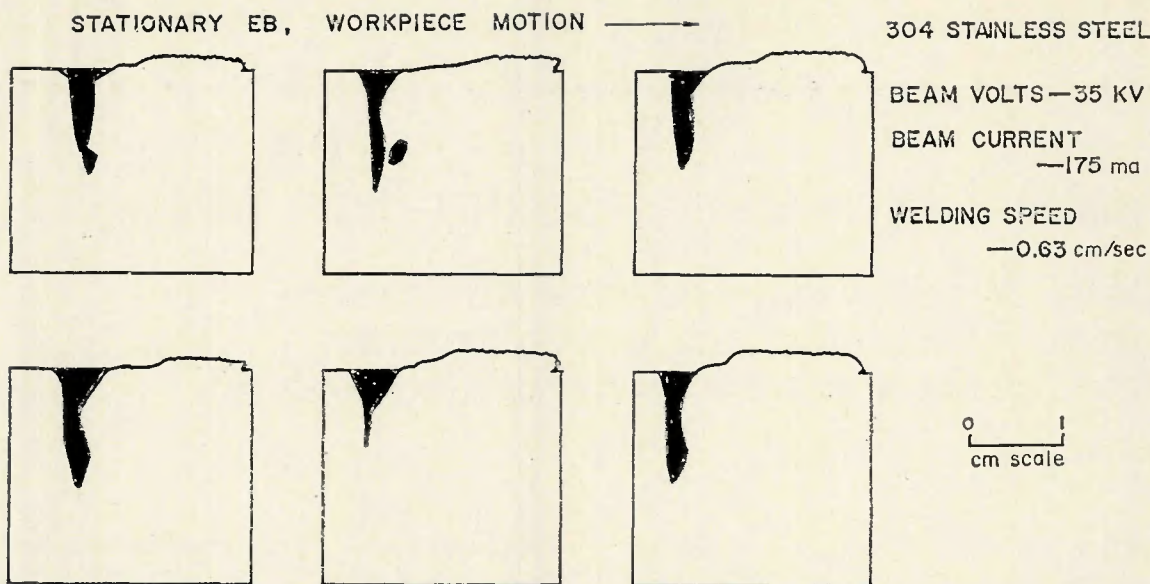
Reproduction of radiographs of electron beam welding cavity in stainless steel
